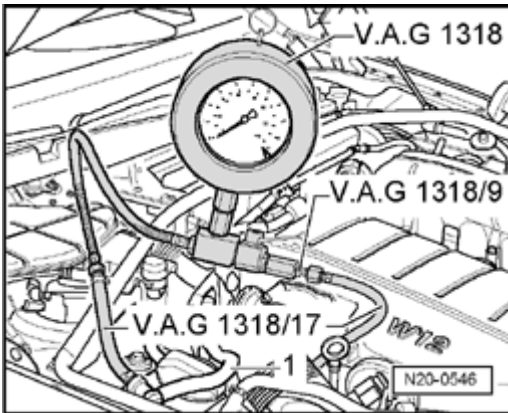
Connecting Pressure Gauge V.A.G 1318 With Adapter V.A.G 1318/9 And Adapters V.A.G 1318/17 To Supply Line And To Hose For Fuel Distributor
